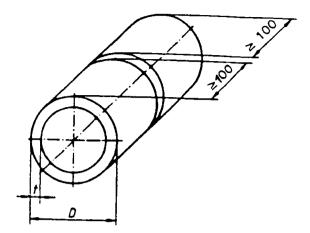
Dimensions of test piece for a butt weld in pipe
